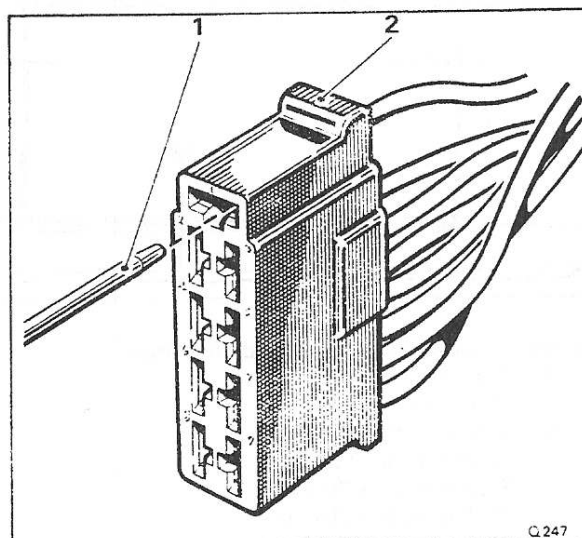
Positioning the cable release tool into a loom plug (Camargue)
